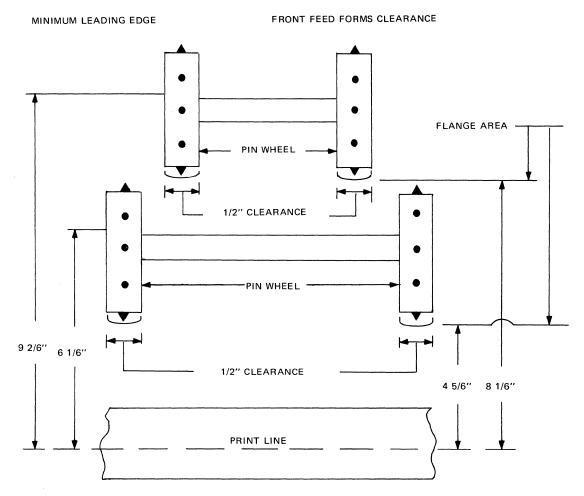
Minimum Leading Edge and Front Feed Form Clearance of Pin Feed Device
